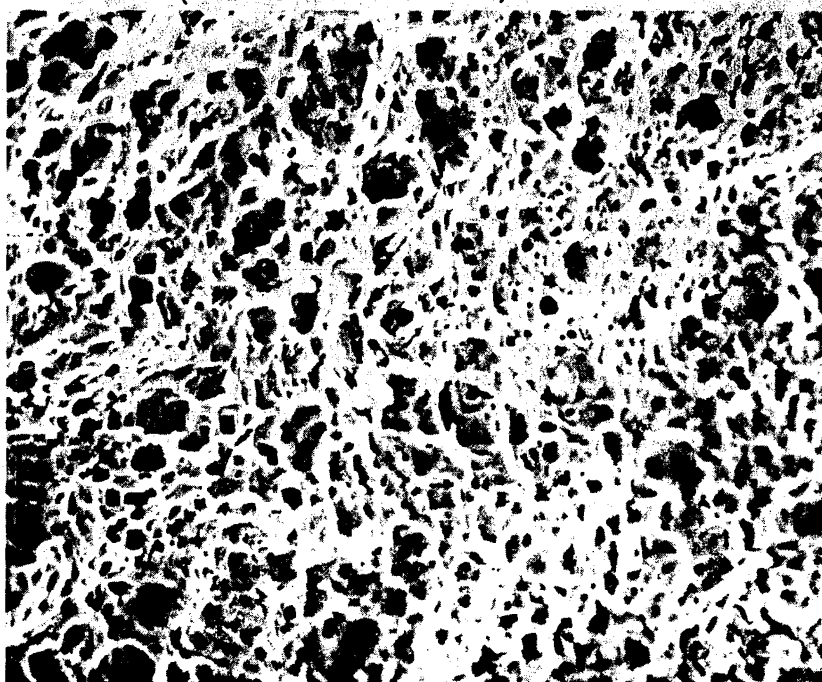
DUCTILE CRACK GROWTH IN THE VESSEL SHELL BELOW THE FILLET WELD ON THE VALVE-END SIDE OF THE MIDDLE STIFFENER RING
